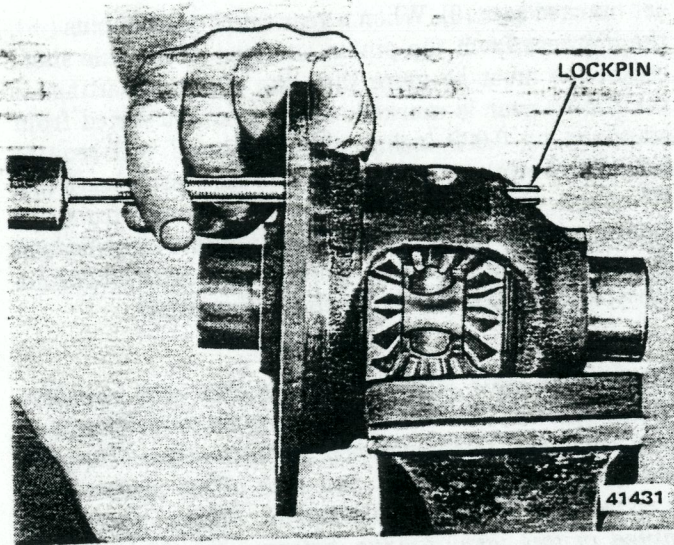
F-33 Pinion Mate Shaft Lockpin Removal
